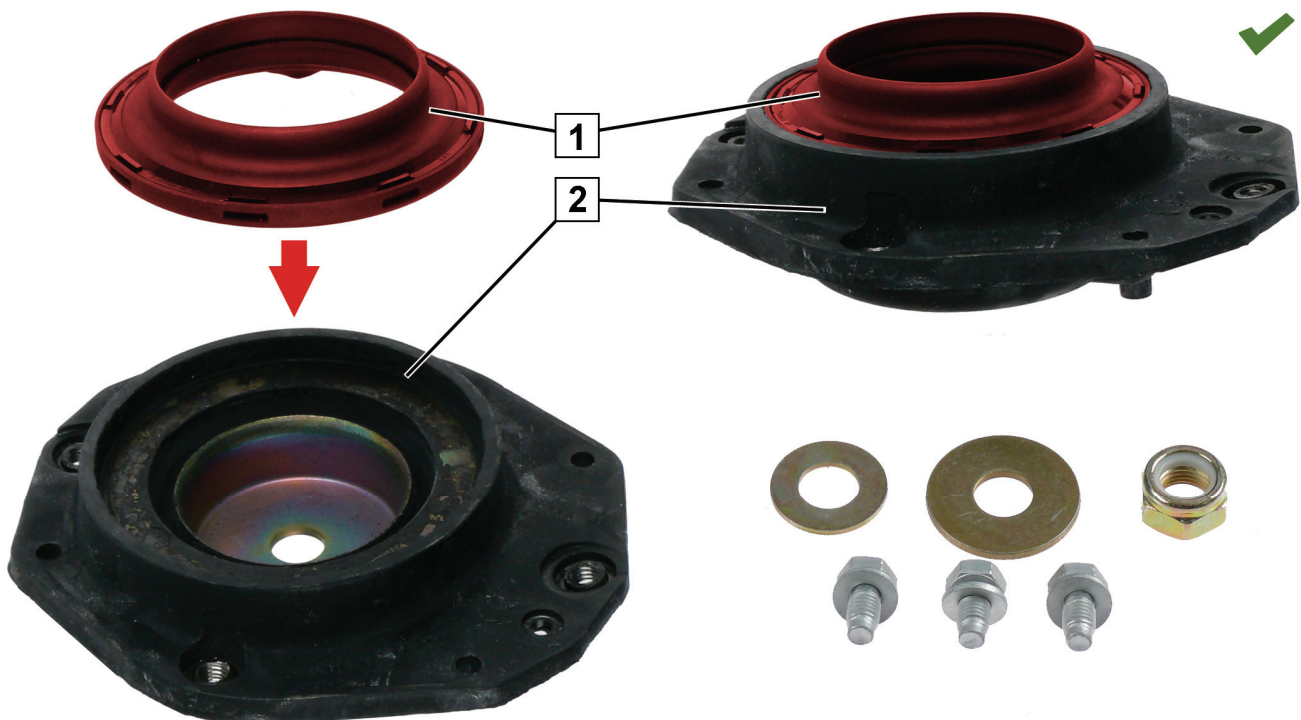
Suspension strut mount – correct assembly of the antifriction bearing and the rubber-to-metal component
